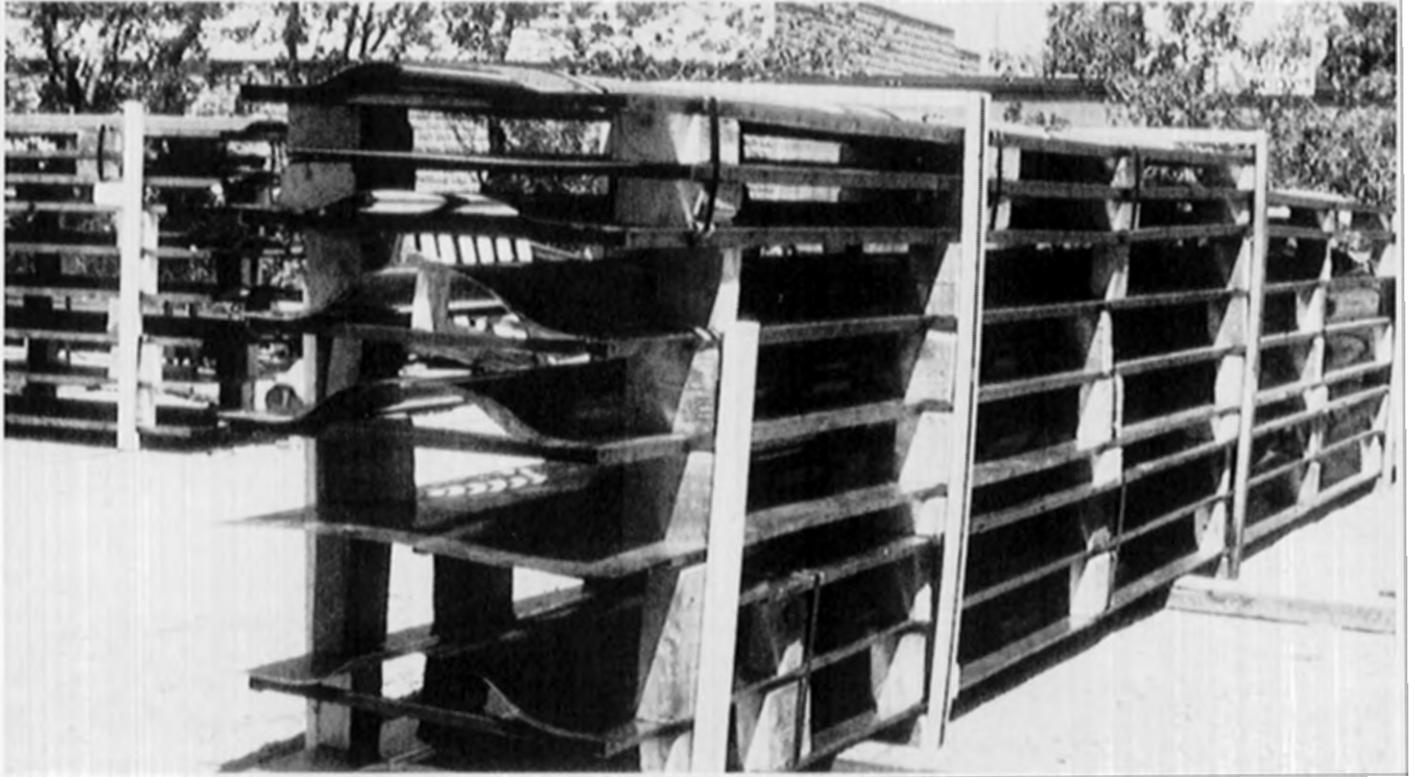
Three 12-foot long contraction joint sections were welded together by manual GMAW, forming 36-foot sections which were crated for shipment to the job site. Welding three sections together in the shop reduced field welding of the joints by two-thirds. The sections have different bend profiles because they were pre-extended to specific widths.
